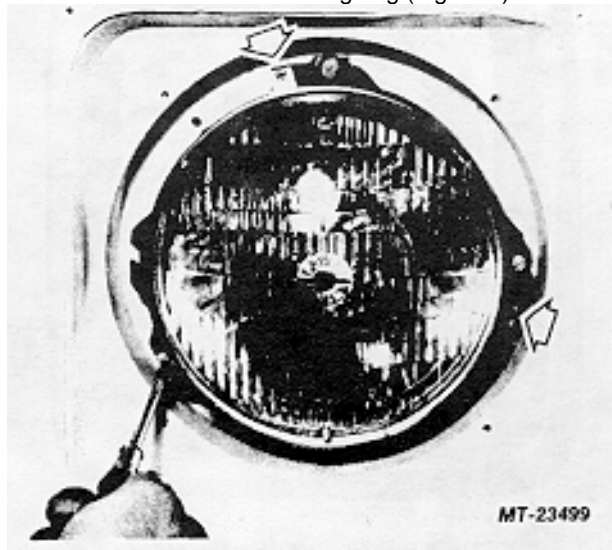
Removing Sealed Beam Unit Retaining Ring
